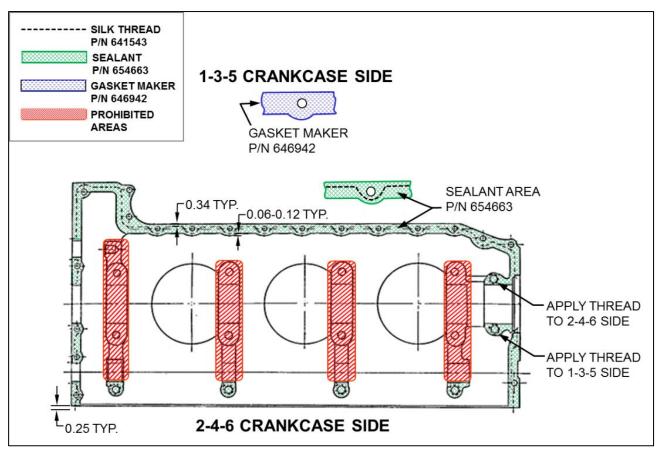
Sealant application diagram for the Continental O-470 engine as illustrated in Continental SIL99-2C.
